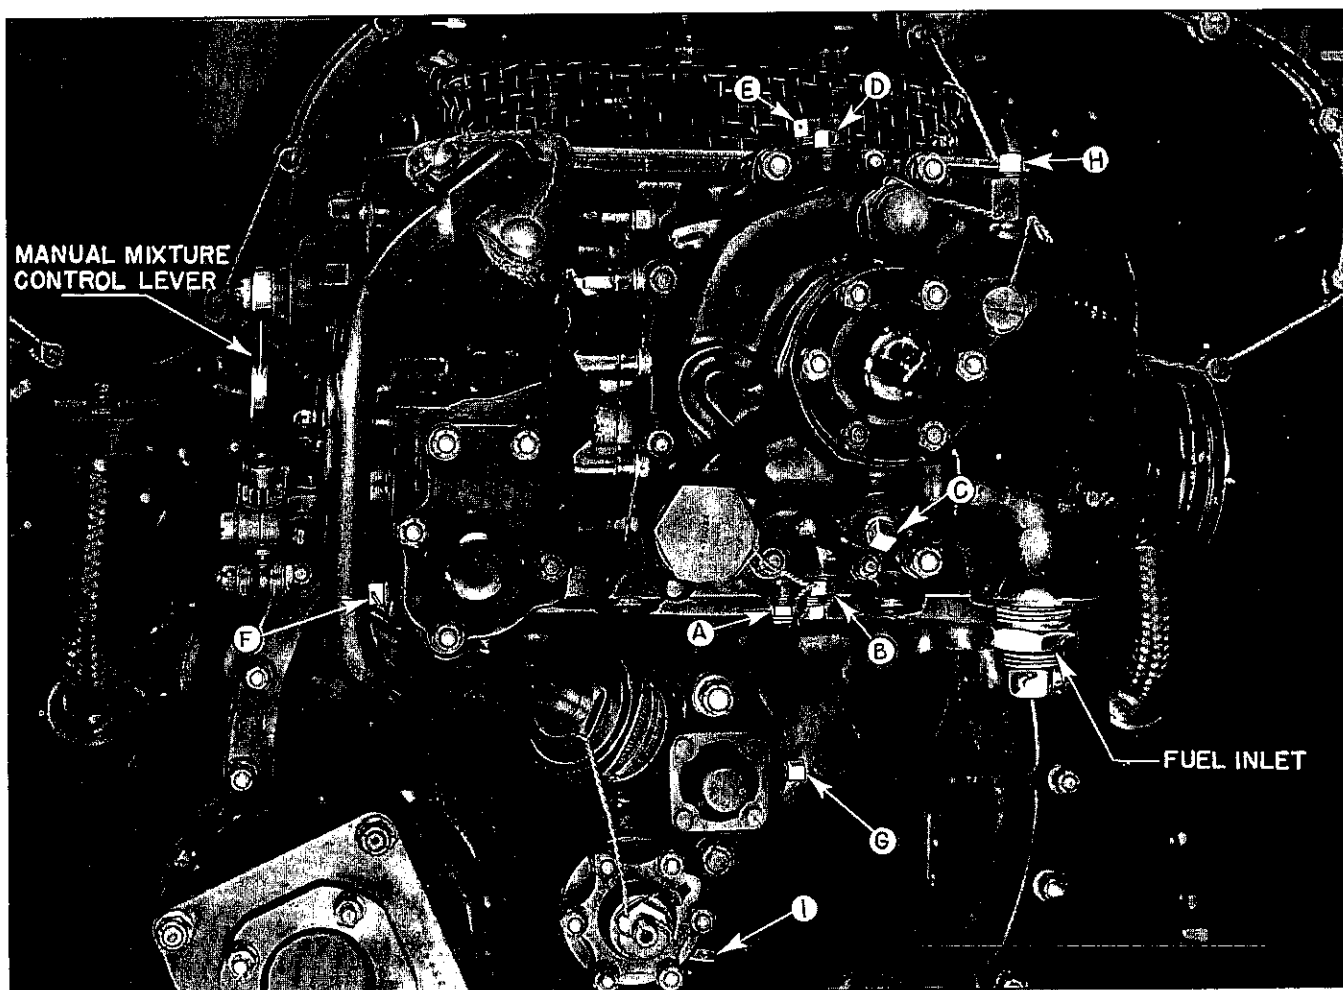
Guide to Plugs and Fittings for Preparing Carburetor for Storage.
